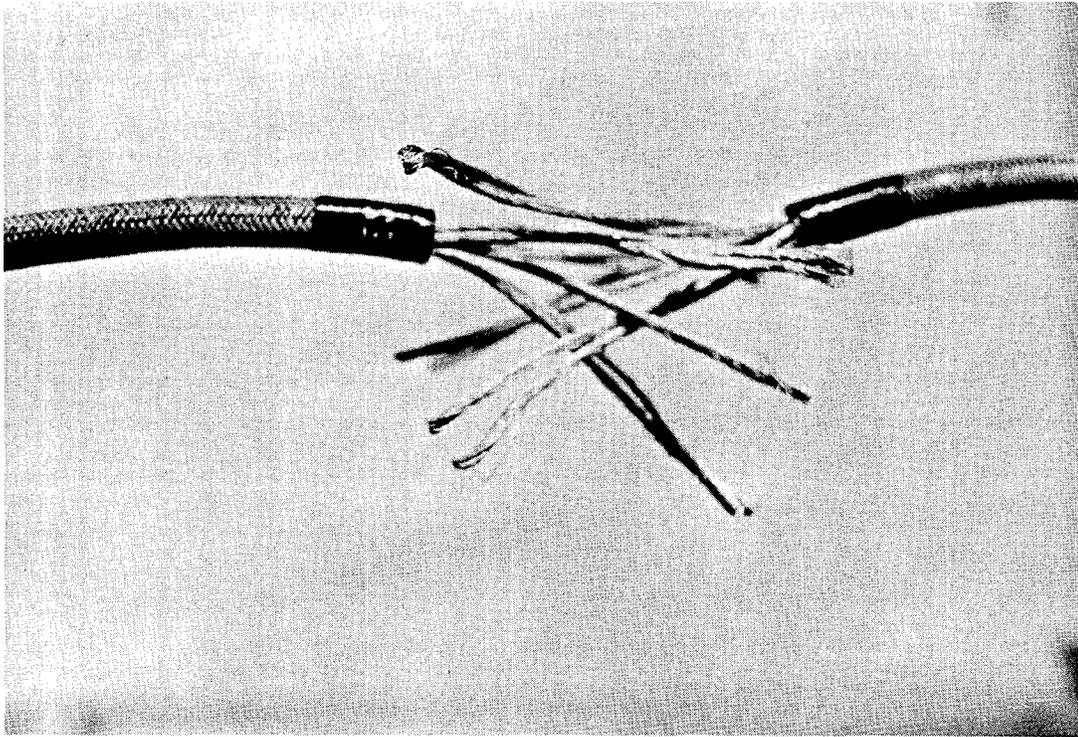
Crow's-footed Conductors Used to Join Sample Ends.
